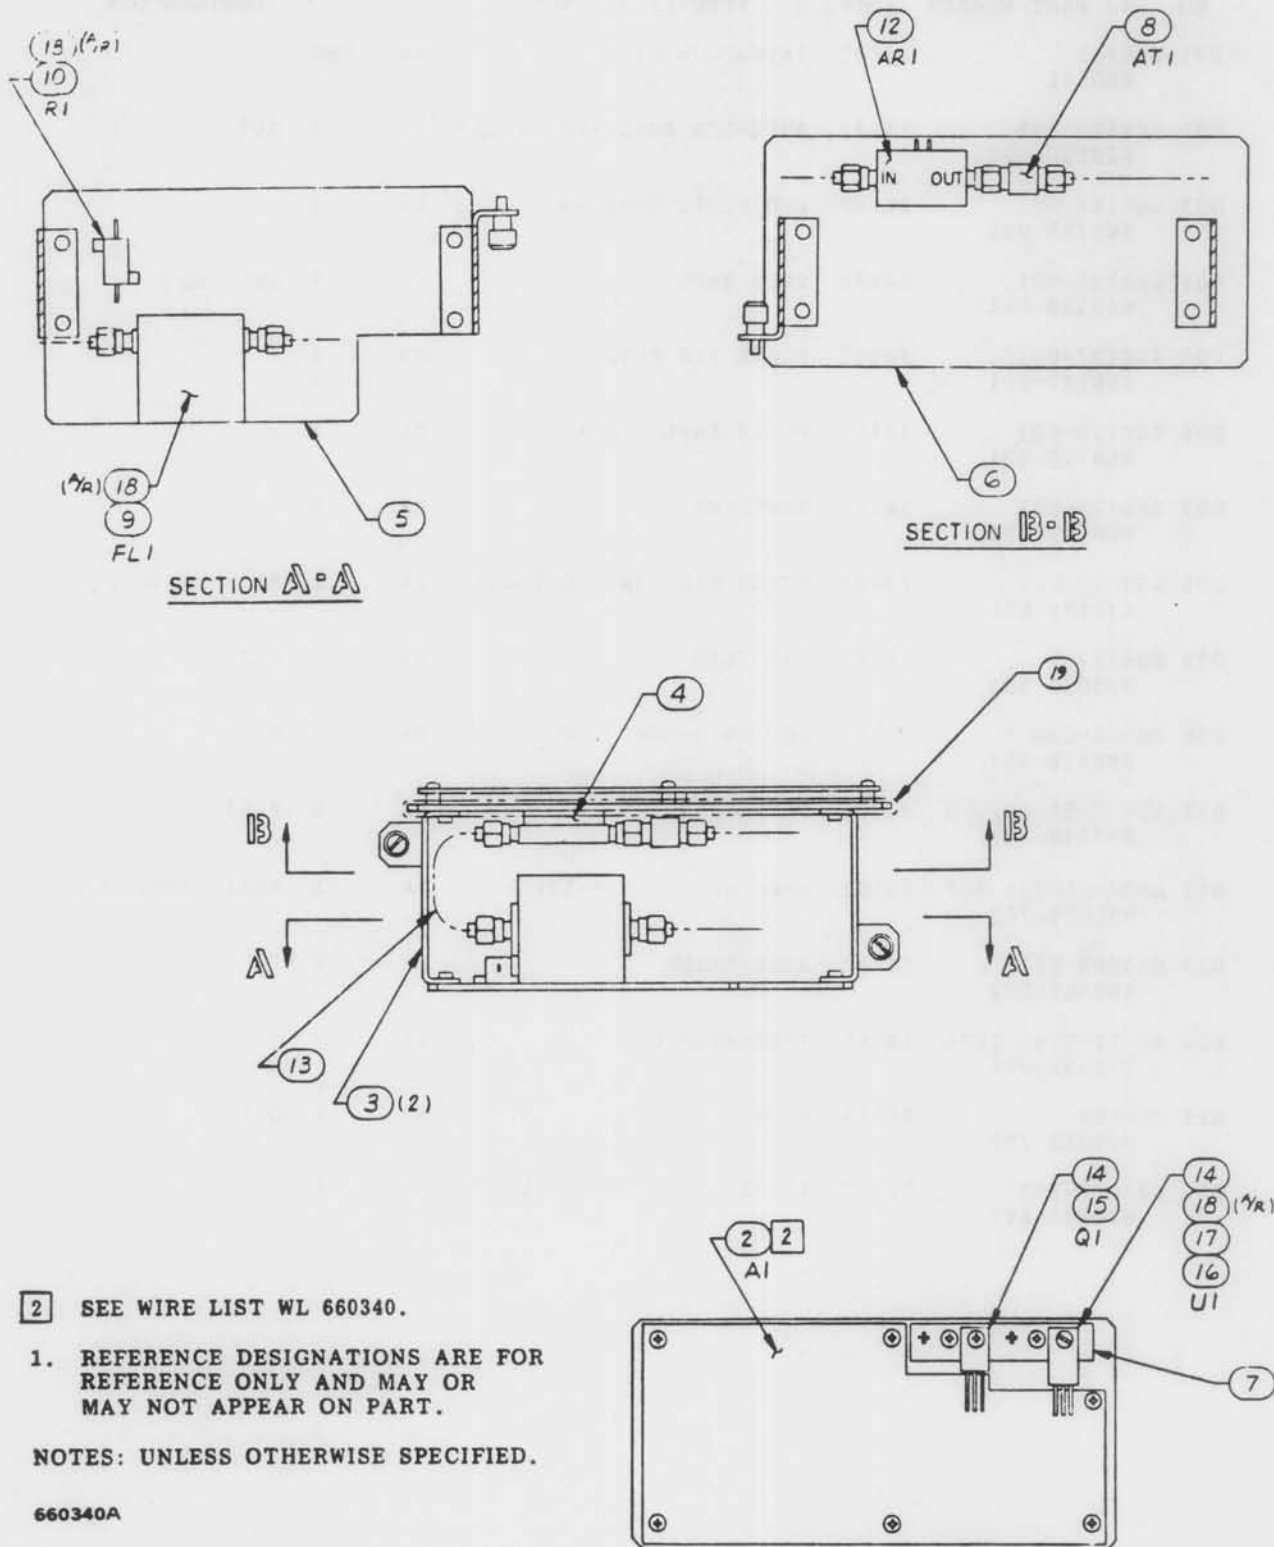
1 to 4 GHz Front End A7 Parts List, Part No. 660340 (Sheet 1 of 3)
